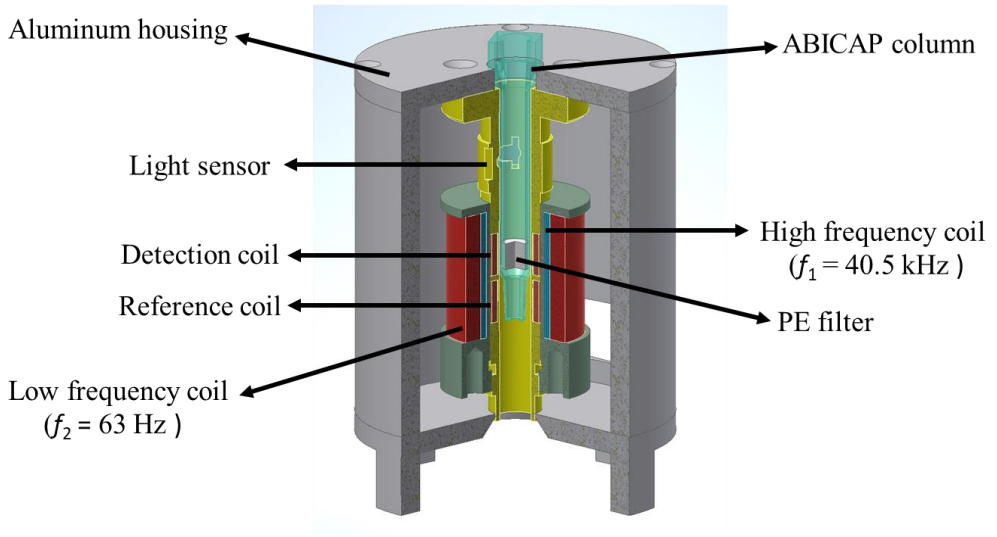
The measurement head 3D assembly comprises the different coils and their positions.
